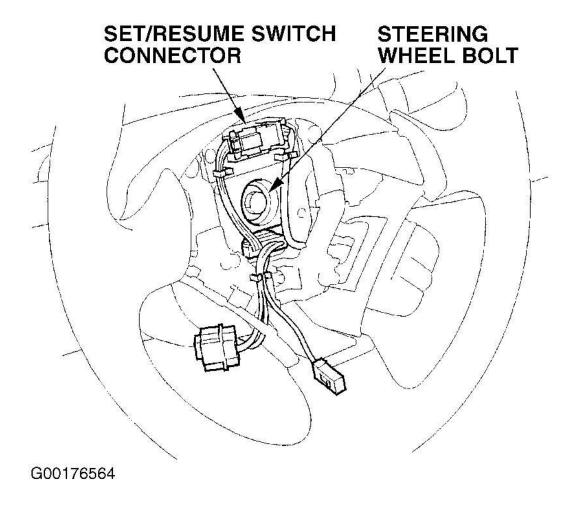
Locating Cruise Control Set/Resume Switch Control & Steering Wheel Bolt (RSX) Courtesy of AMERICAN HONDA MOTOR CO., INC.
